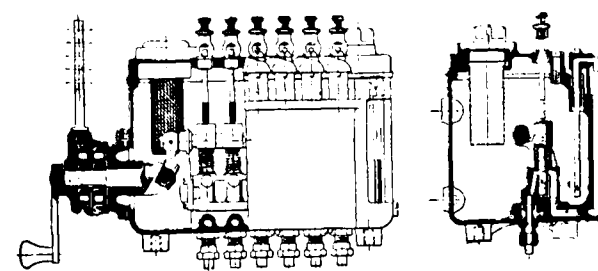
Sectional drawing of the D.S.I. Lubricator.
